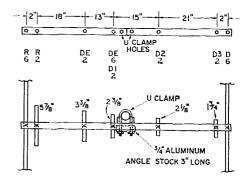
Principal details of the two-band portable array. Positions of the various elements are shown above, with the mounting methods below. Center sections of the 2-meter elements are ¼-inch aluminum rod, tapped for 6-32 thread. The U clamp and angle-stock bracket at the center keep the boom sections in alignment on the vertical support.
